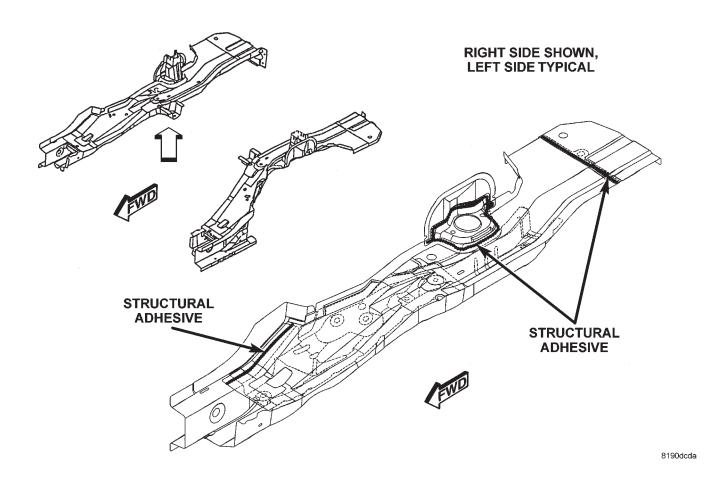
SIDEMEMBER ASSEMBLY (2 OF 3)
